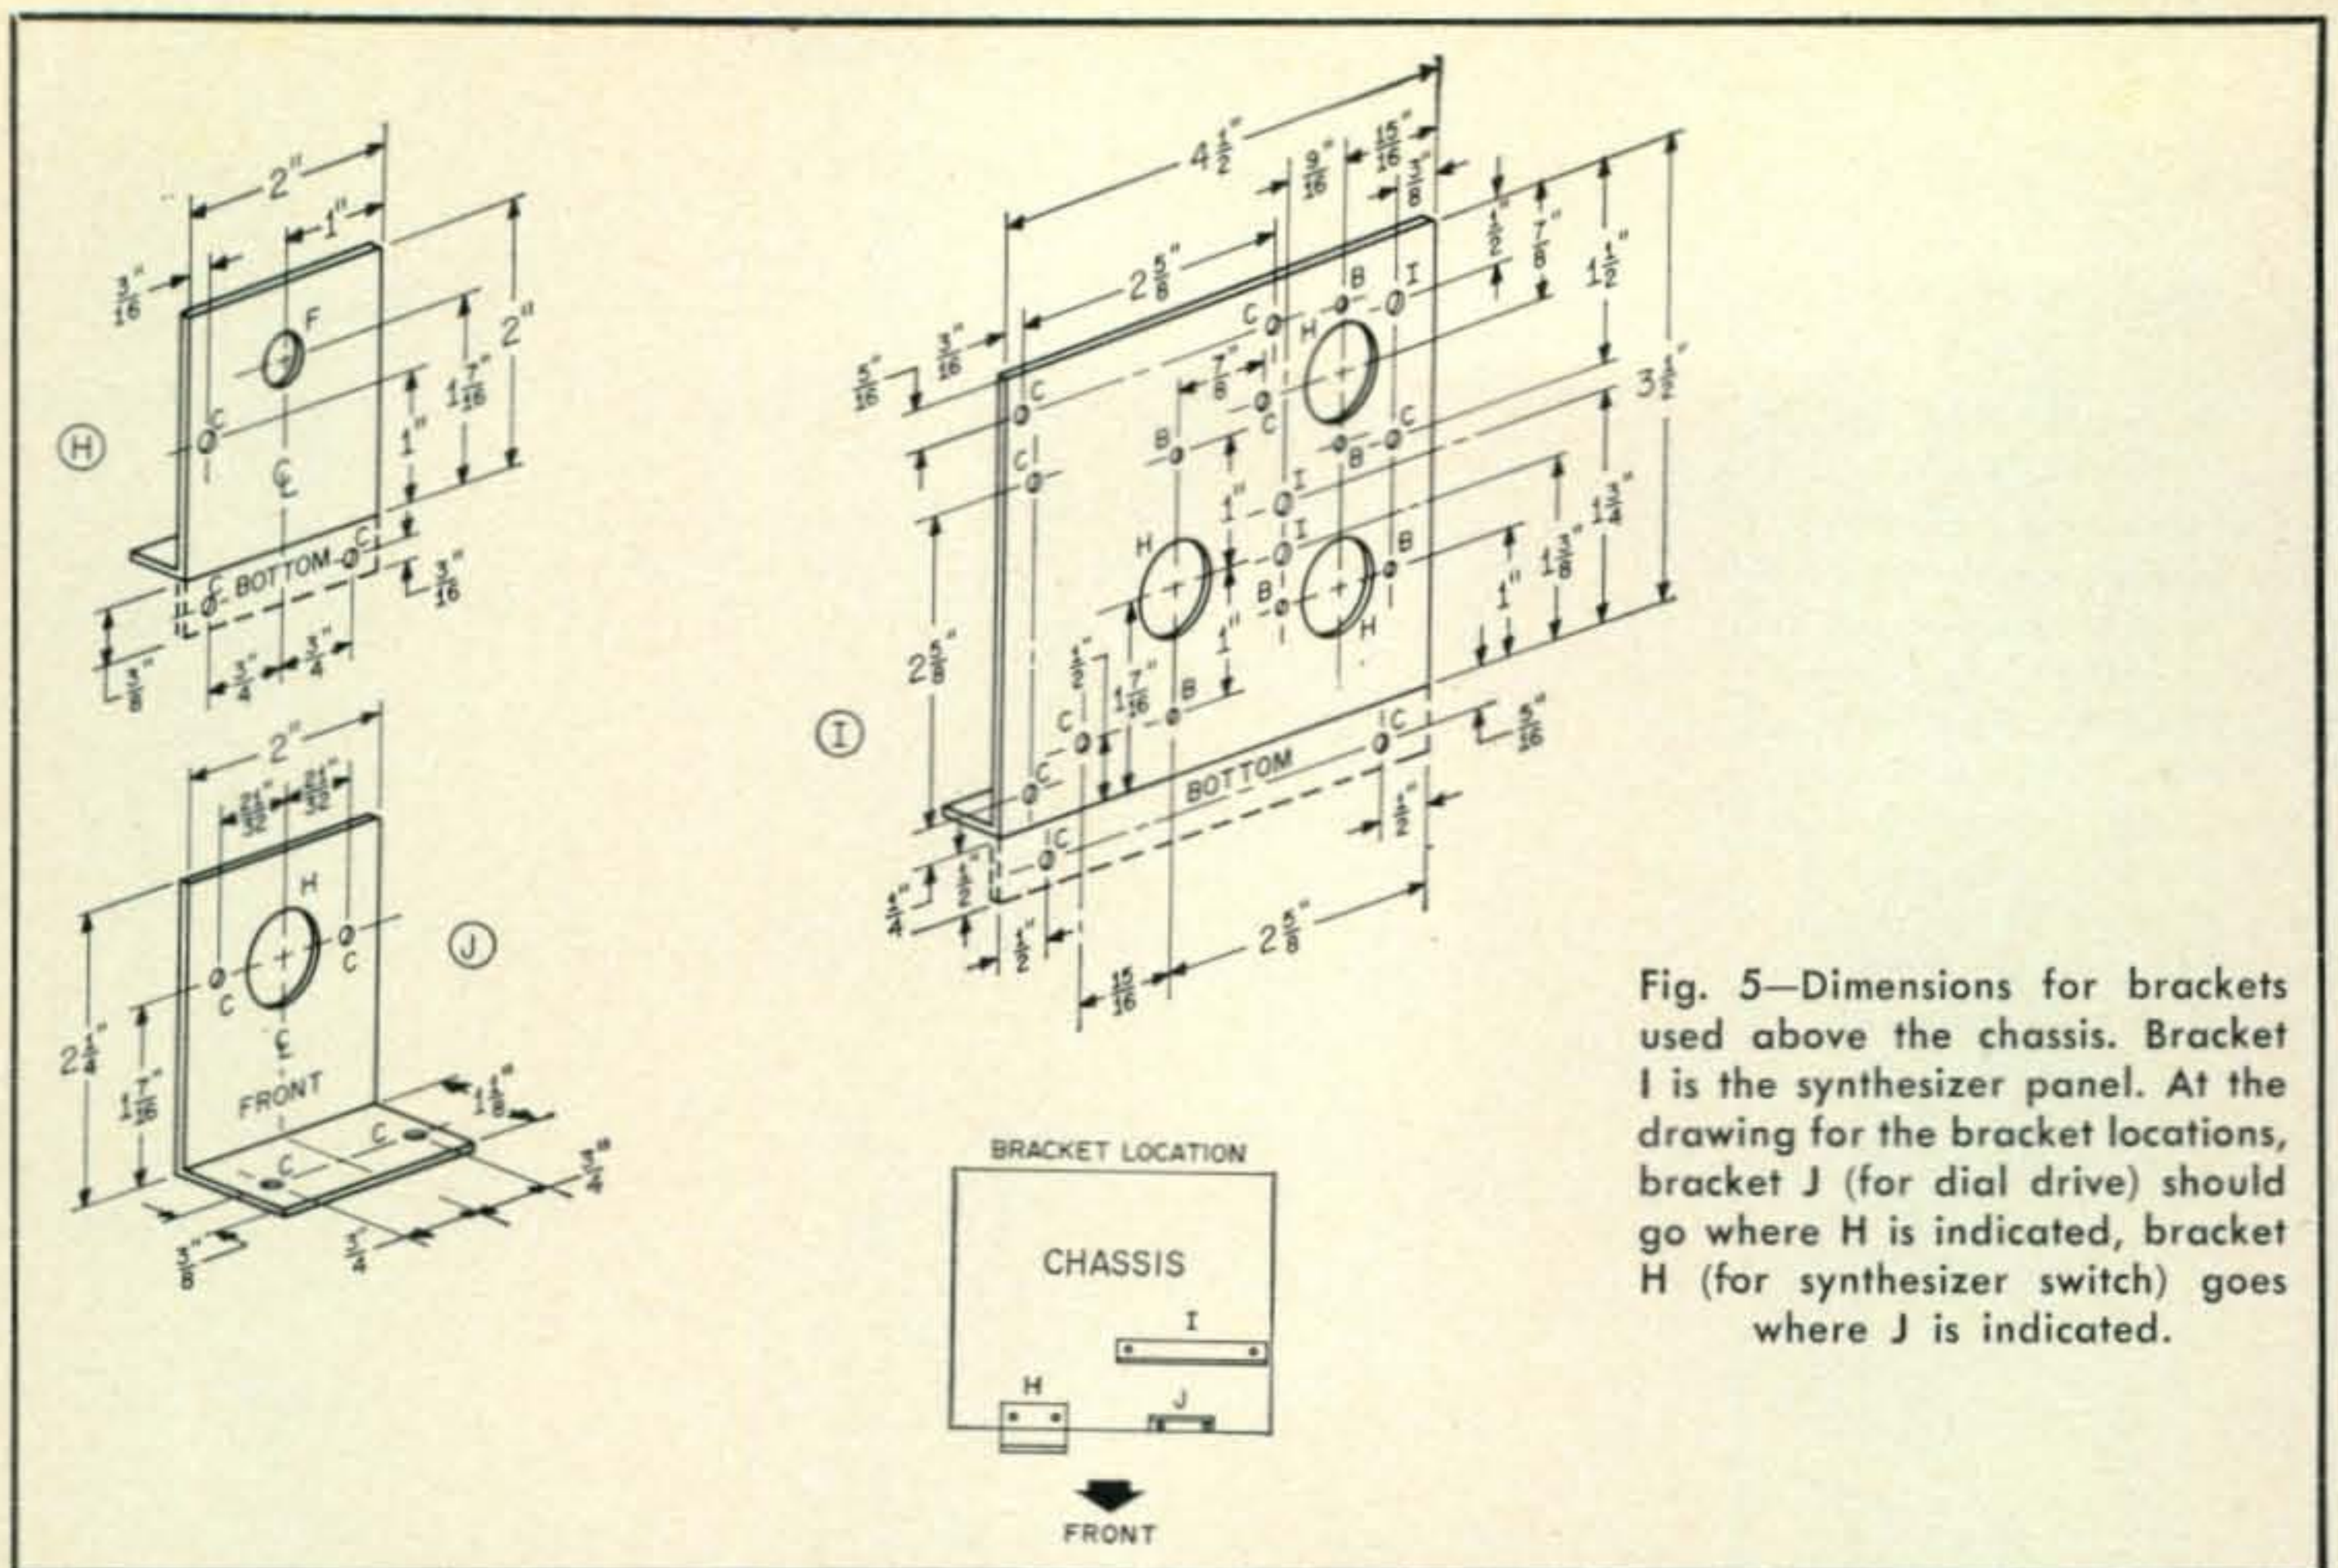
Dimensions for brackets used above the chassis. Bracket I is the synthesizer panel. At the drawing for the bracket locations, bracket J (for dial drive) should go where H is indicated, bracket H (for synthesizer switch) goes where J is indicated.
